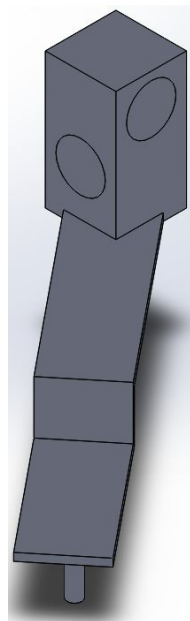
Right Side Slider Bracket CAD Drawing
